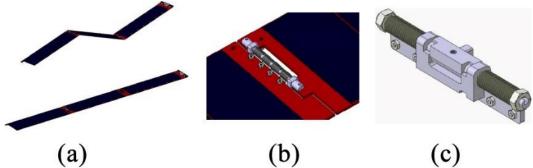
Revolute Joint in Deployable Solar Panel, figure reprinted from [2]. (a). Solar panel assembly; (b). Main hinge assembly; (c). Main hinge assembly
